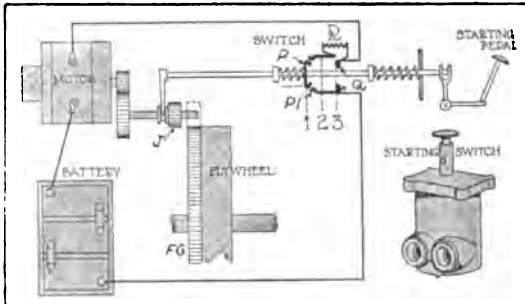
Mechanical method of applying starting motor to drive fly wheel.
